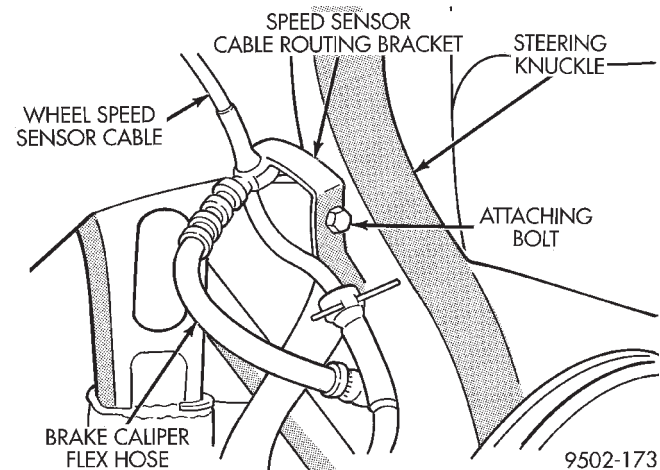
Wheel Speed Sensor Cable Routing Bracket
